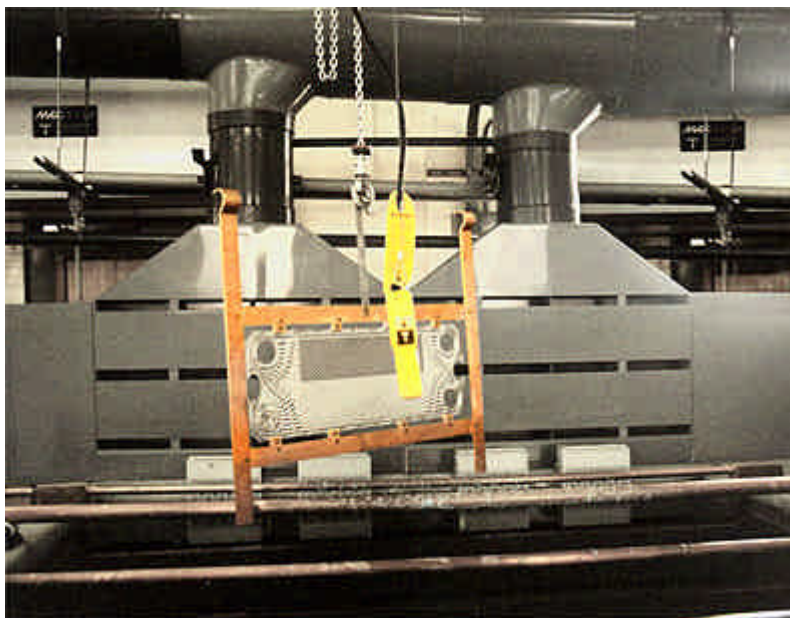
B. Note the heavy copper bussing used for distributing the current to the work. The ventilating system for this line is designed for 17,000 cfm. The thin-film atmospheric evaporator used in recovery of the electrolyte is visible at the upper left of the photo.
